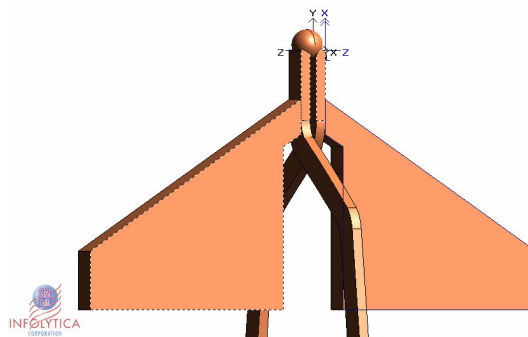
Building block of welded conductors with cooling flanges.
